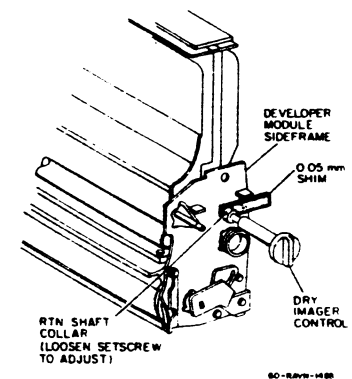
Checking/Adjusting the RTN Shaft Spacing
